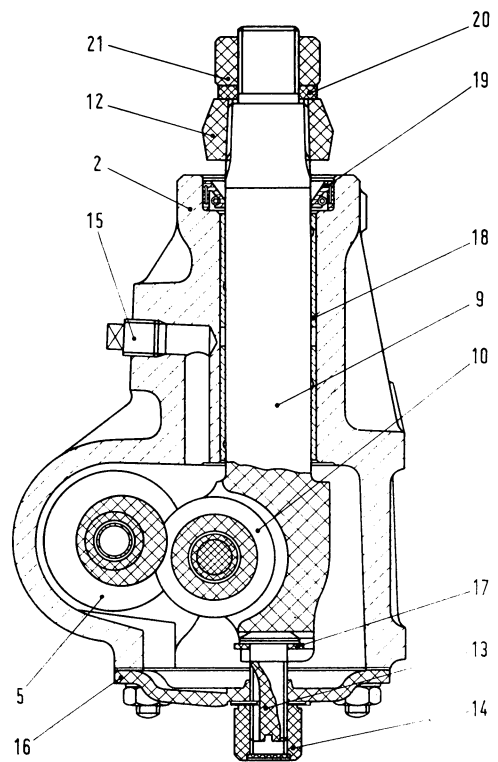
Sectional view of the steering gear across the roller shaft.
